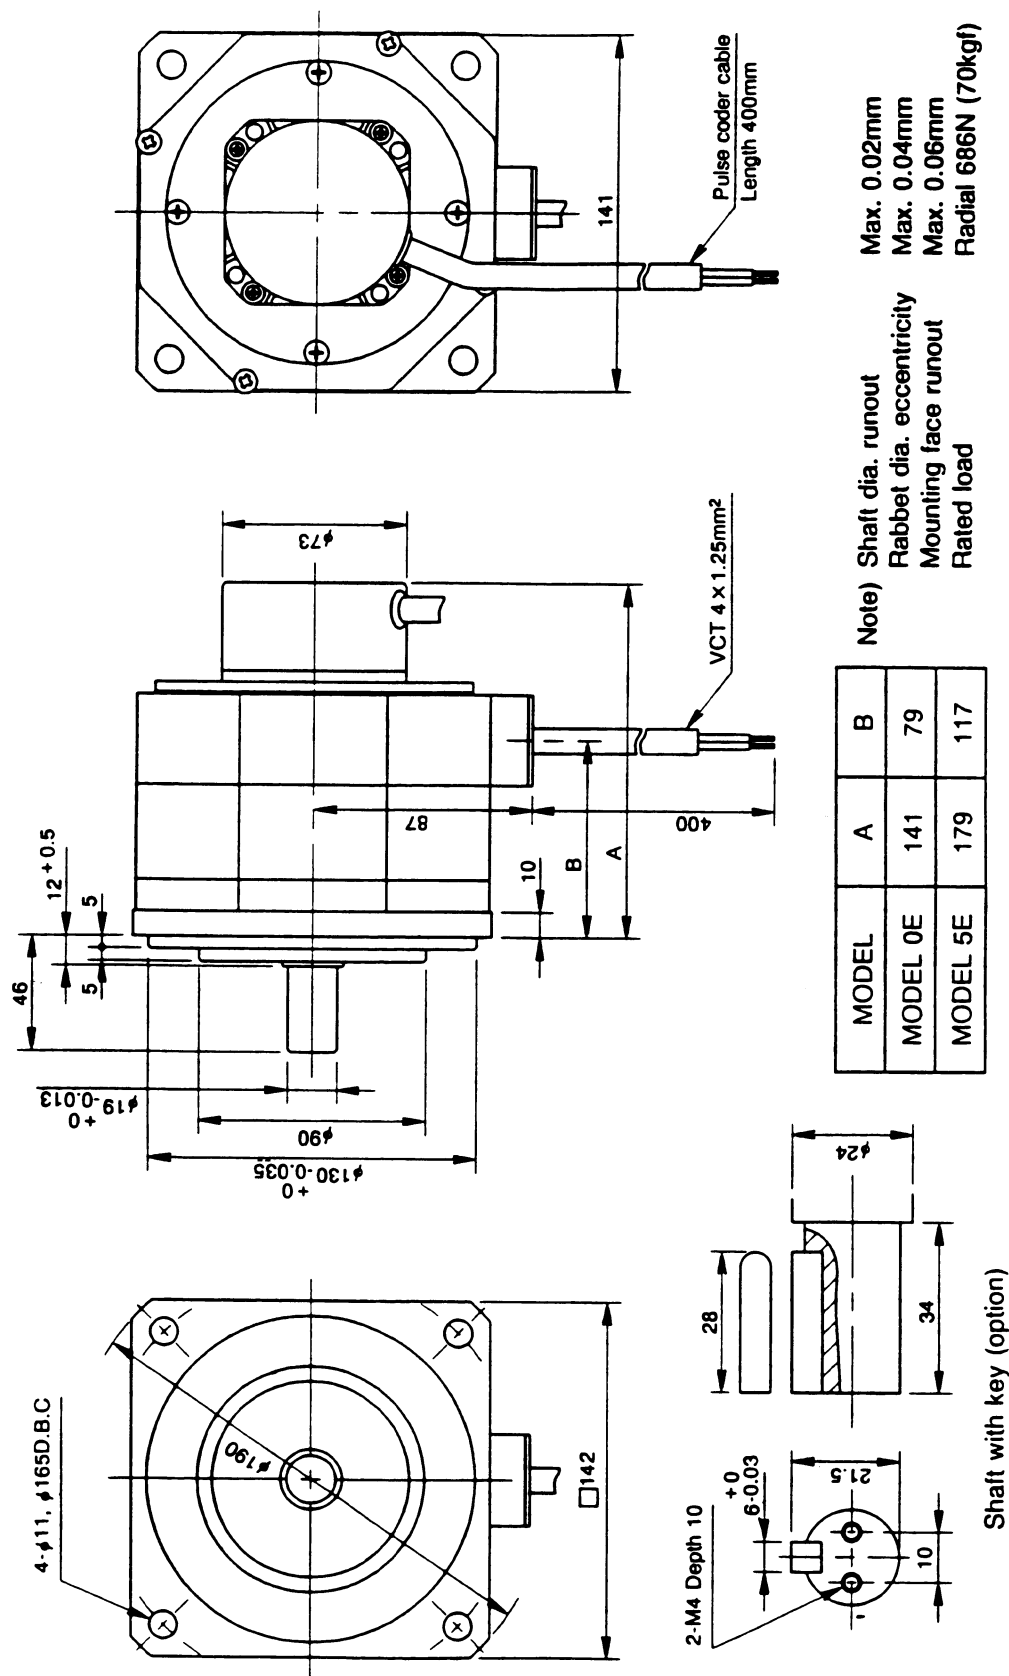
(d) AC Servo Motor 0E, 5E External View
